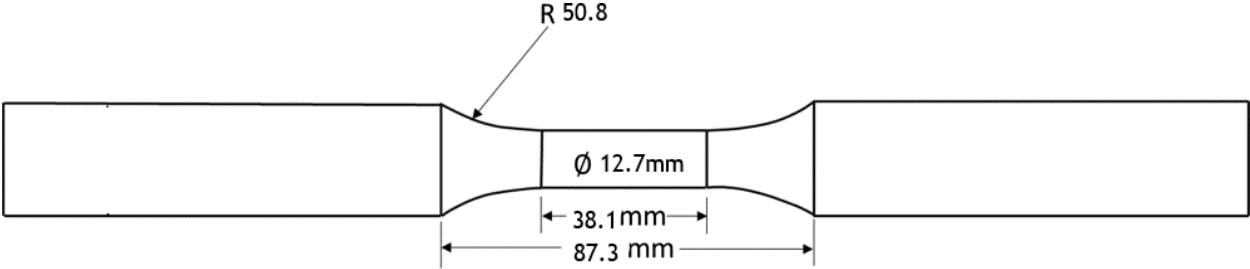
Stainless Steel 316 test sample geometry (cylindrical rod)
